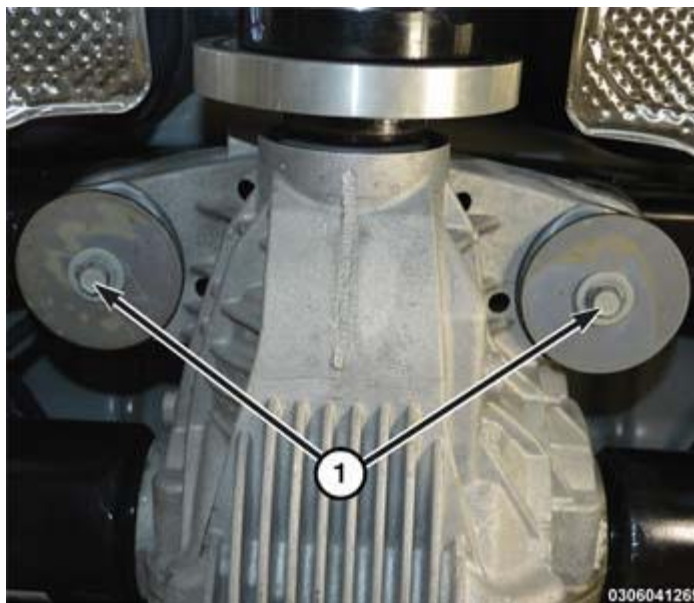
Rear Axle Forward Mount Isolator Bolts
